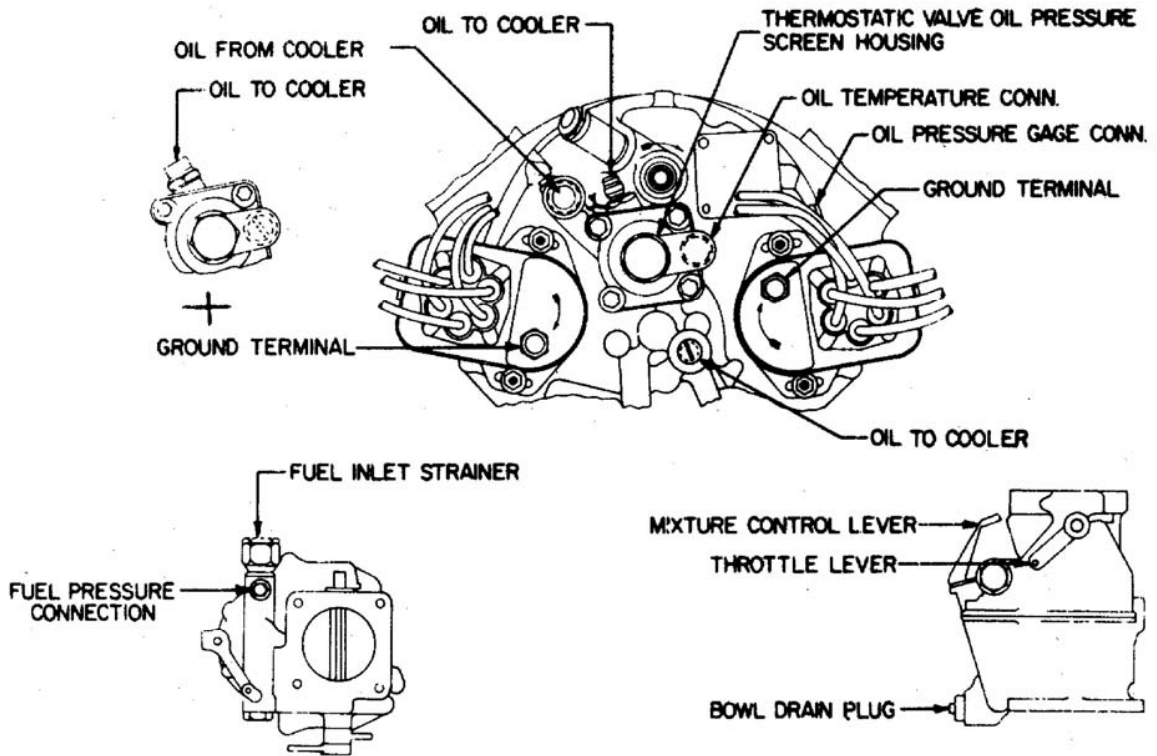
Installation Drawing – Alternate Oil Line Connections, Magnetos and View of Carburetor – O-540 Series
